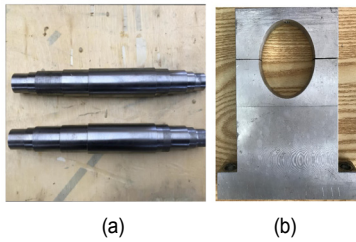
(a) Bending spindle; (b) faulty bearing housing.
